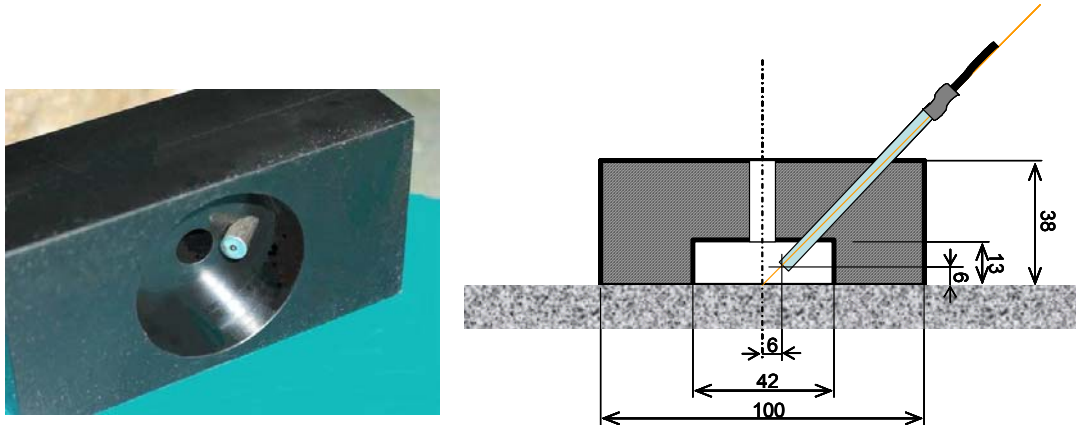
View and dimensions of sensor block. Dimensions are in millimetres.
